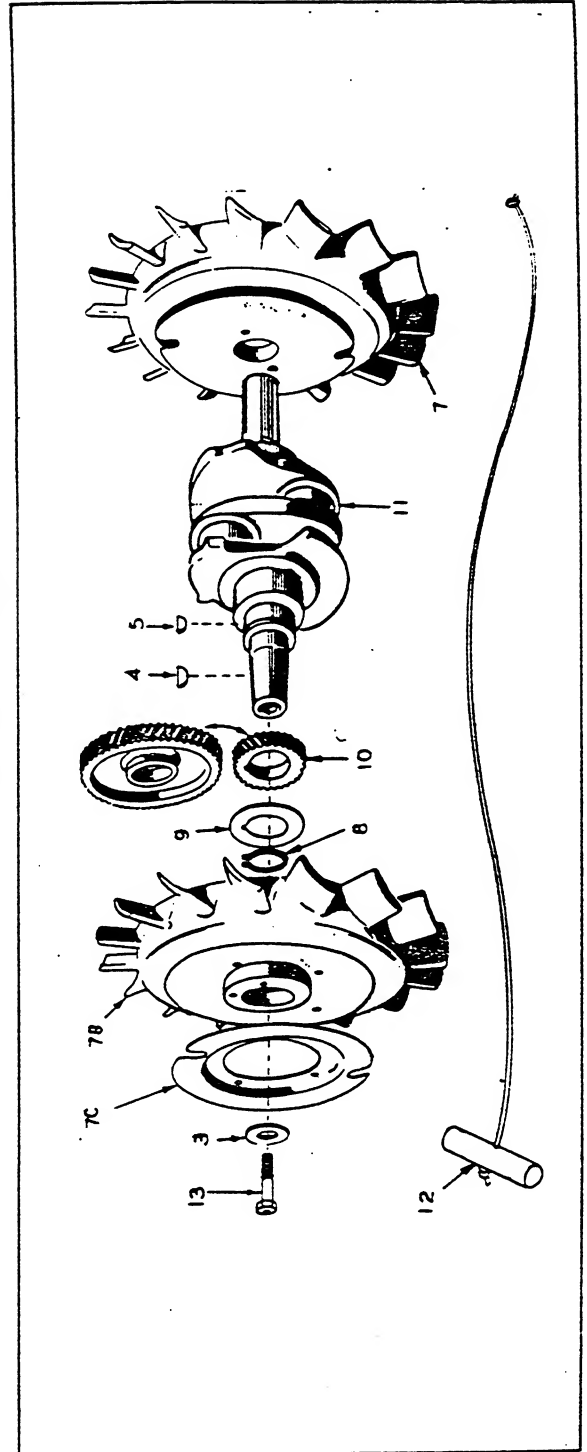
FIG. C-CRANKSHAFT AND FLYWHEEL GROUP
